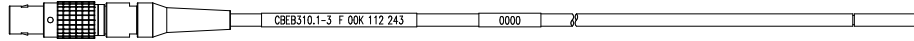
Shielded Automotive-Ethernet cable CBEB310.1-3
